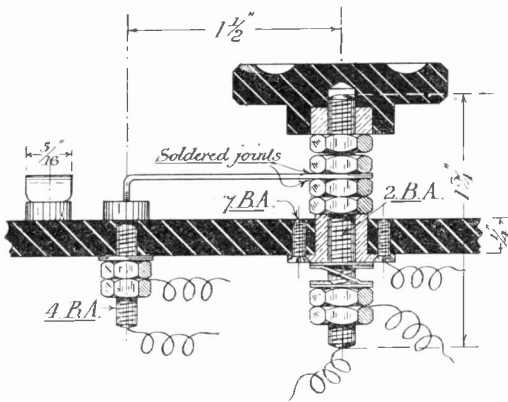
Illustrating the correct method of assembly of a switch, together with suitable dimensions.
